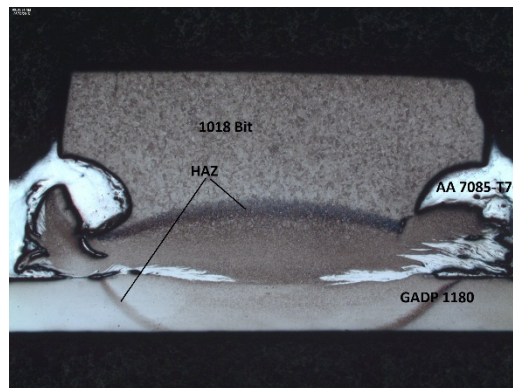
Example of No Void in Sectioned Weld
